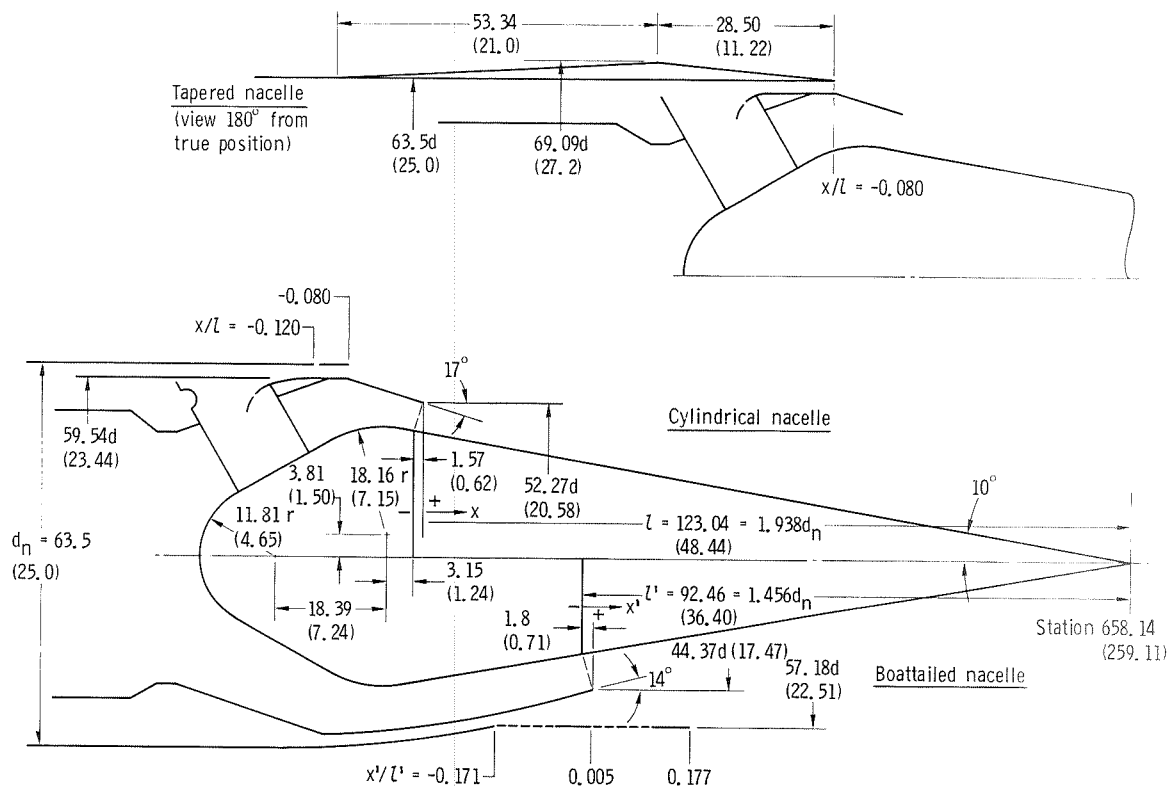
Plug nozzle dimensions. (All dimensions are in cm (in.).)
